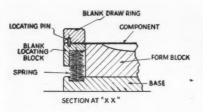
Drawing illustrating method of flanging, using spring block and draw ring.
